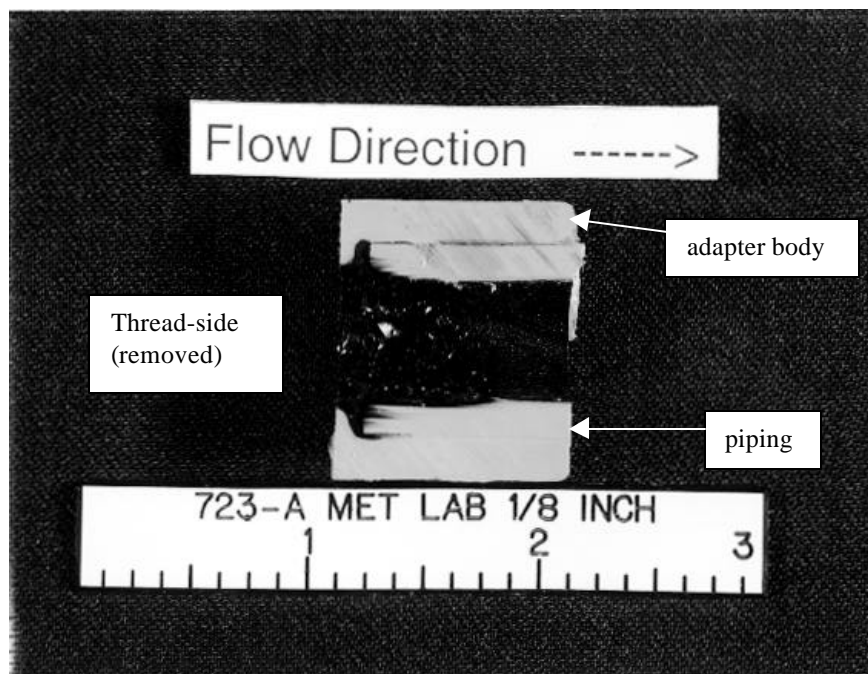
Cross-section of failed fitting adapter and joined piping (Neg#54980, 1X)
